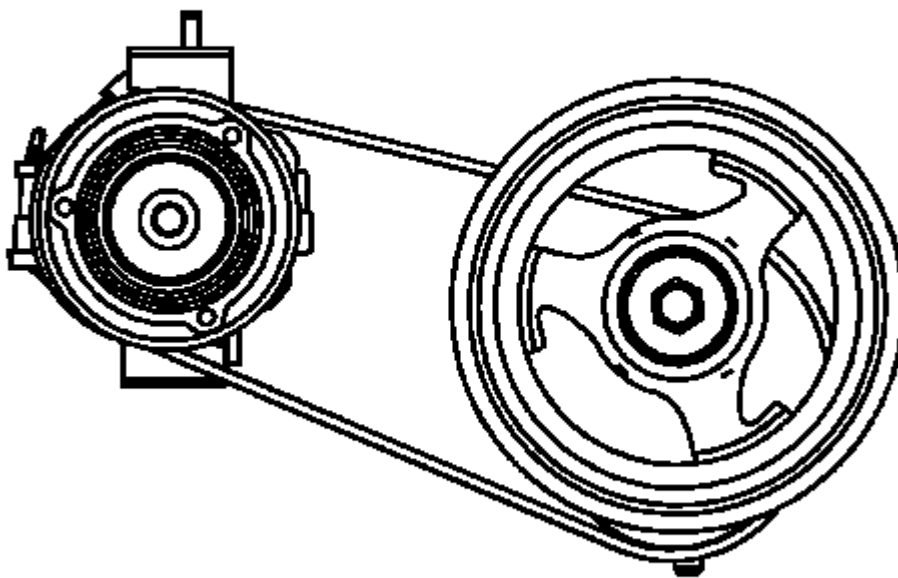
Position Belt Behind Rear Face Of Balancer And Around A/C Pulley
